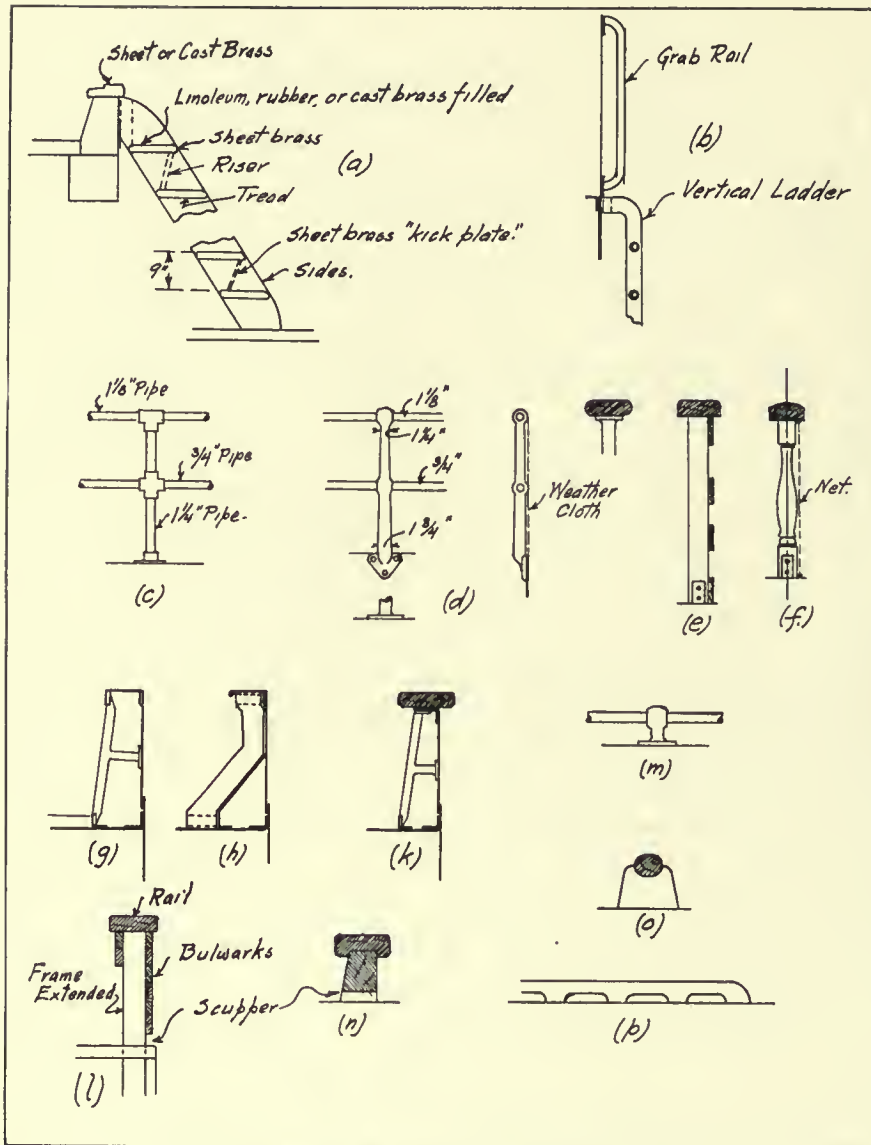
CONSTRUCTION DETAILS OF LADDERS AND RAILS
